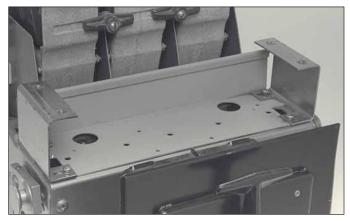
Installing the Trip Unit Assembly Mounting Brackets
